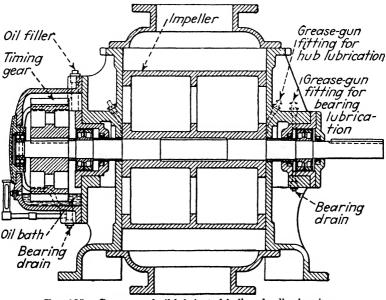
Grease- and oil-lubricated ball and roller bearings.
